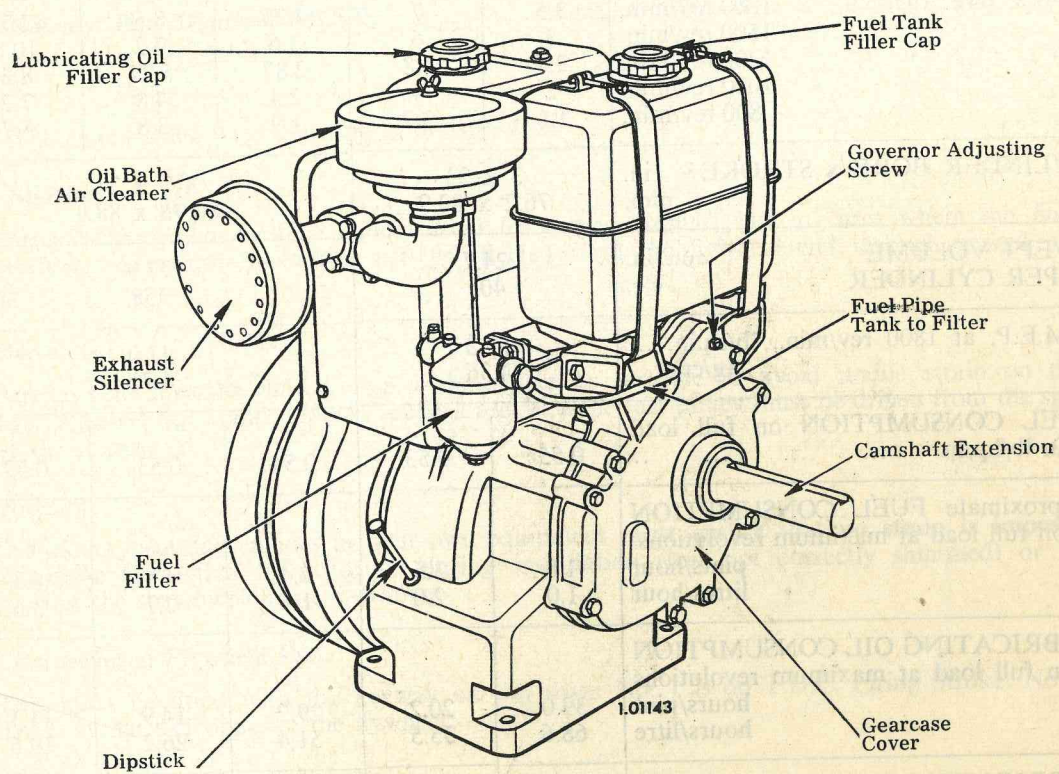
Type LD1 or SL1 Engine—Back View.
